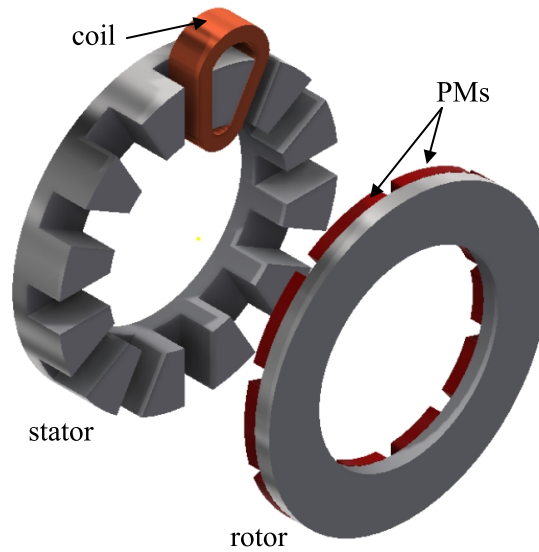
Basic structure of a one-stator one-rotor axial flux permanent magnet machine. (Source: own elaboration)
